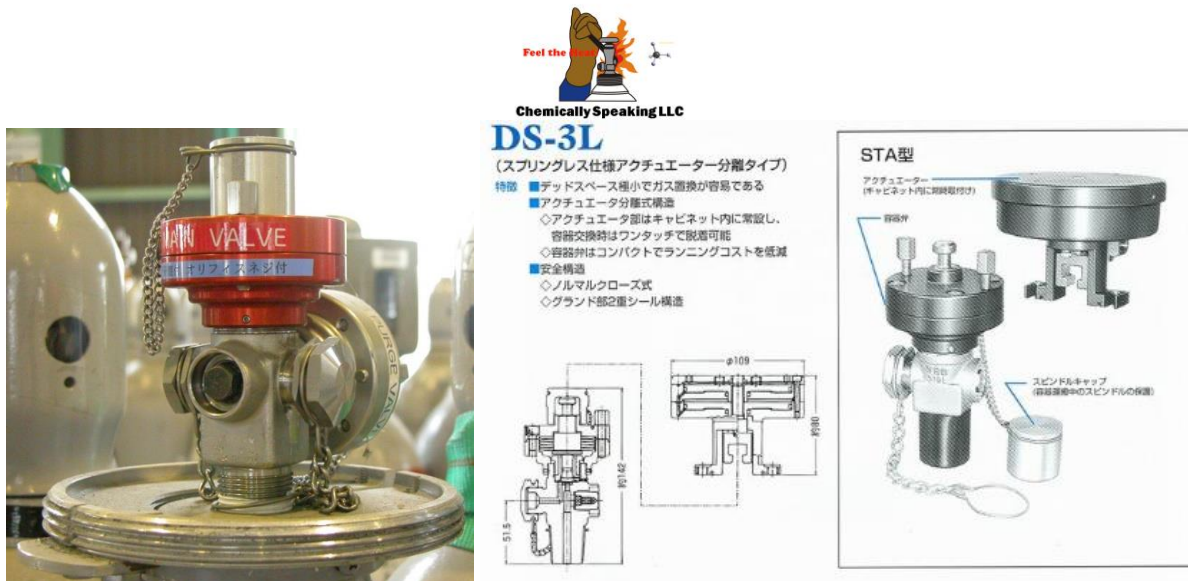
& 27: Neiriki Valve Without Actuator Attached and Pneumatic Actuator
